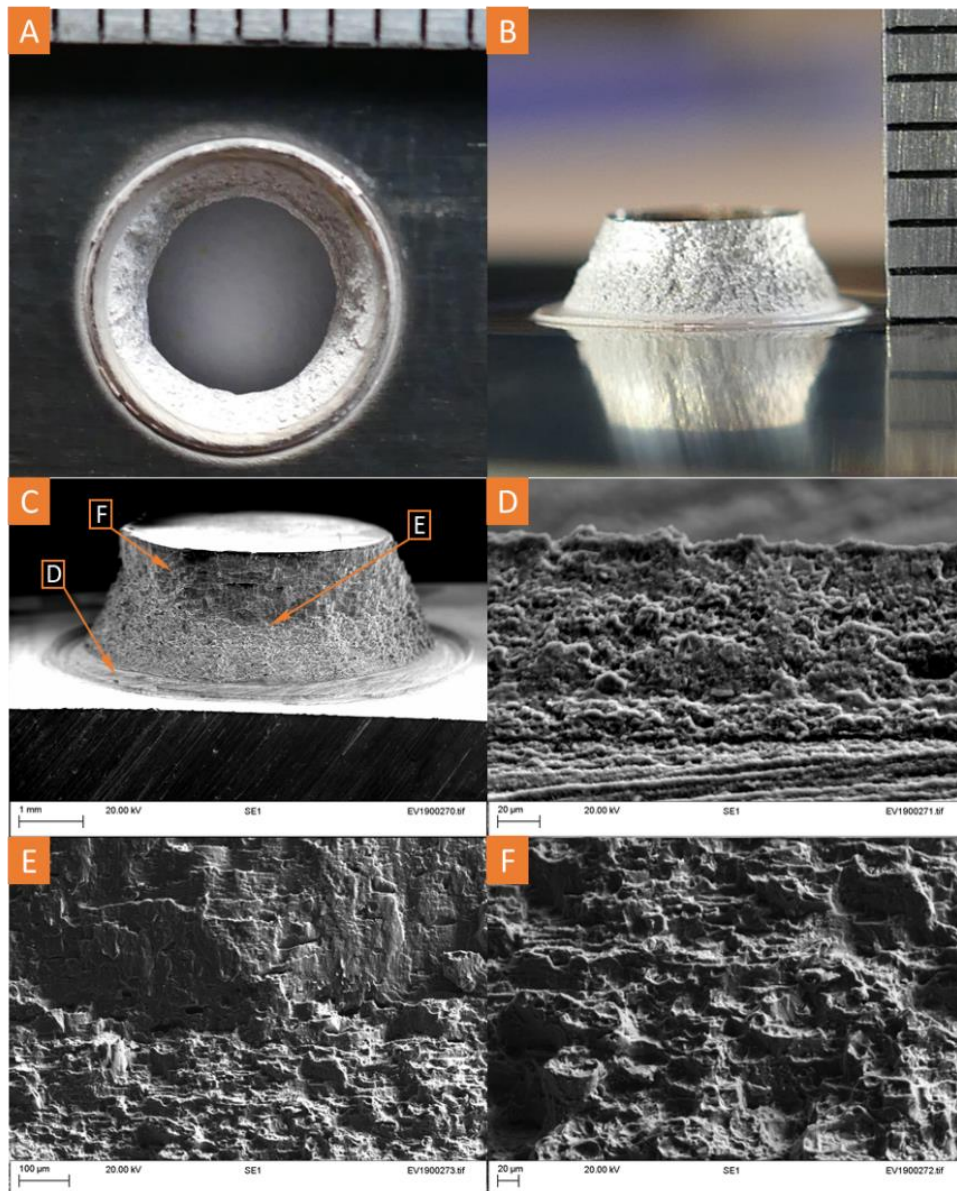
Fracture surfaces of a plug pull out bottom sheet failure mode of RFSSW AA7075-T6 condition W27 (RS = 2160 rev/min; PD = 2.4 mm):
